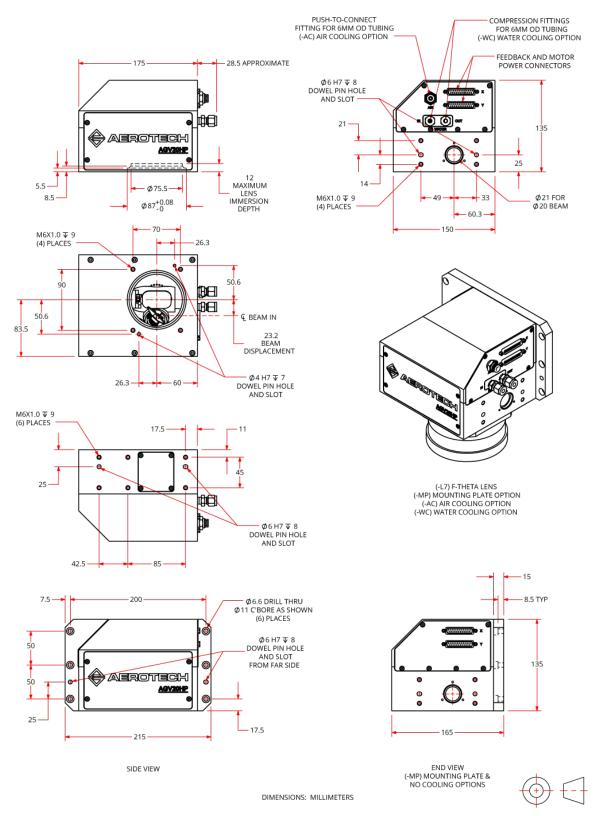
AGV20HP-BE1 Galvanometer Scanner Dimensions
